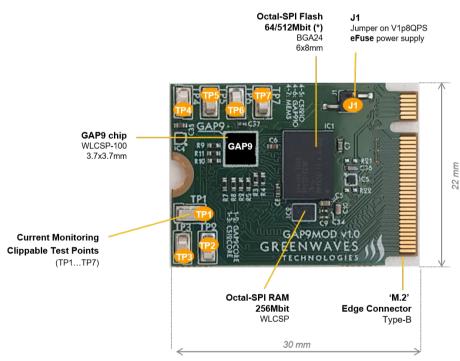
b.1 – GAP9Mod v1.x PCB (Top side)
